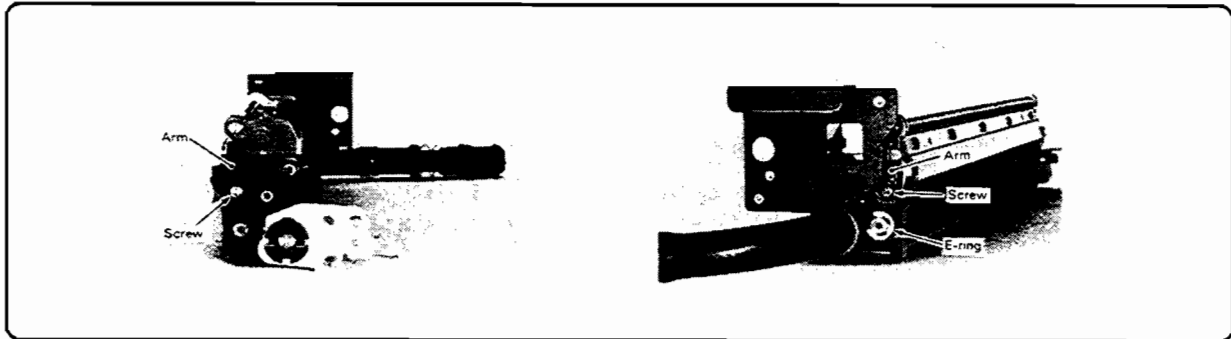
Cleaning Station Rear Arm and E-Ring Removal
